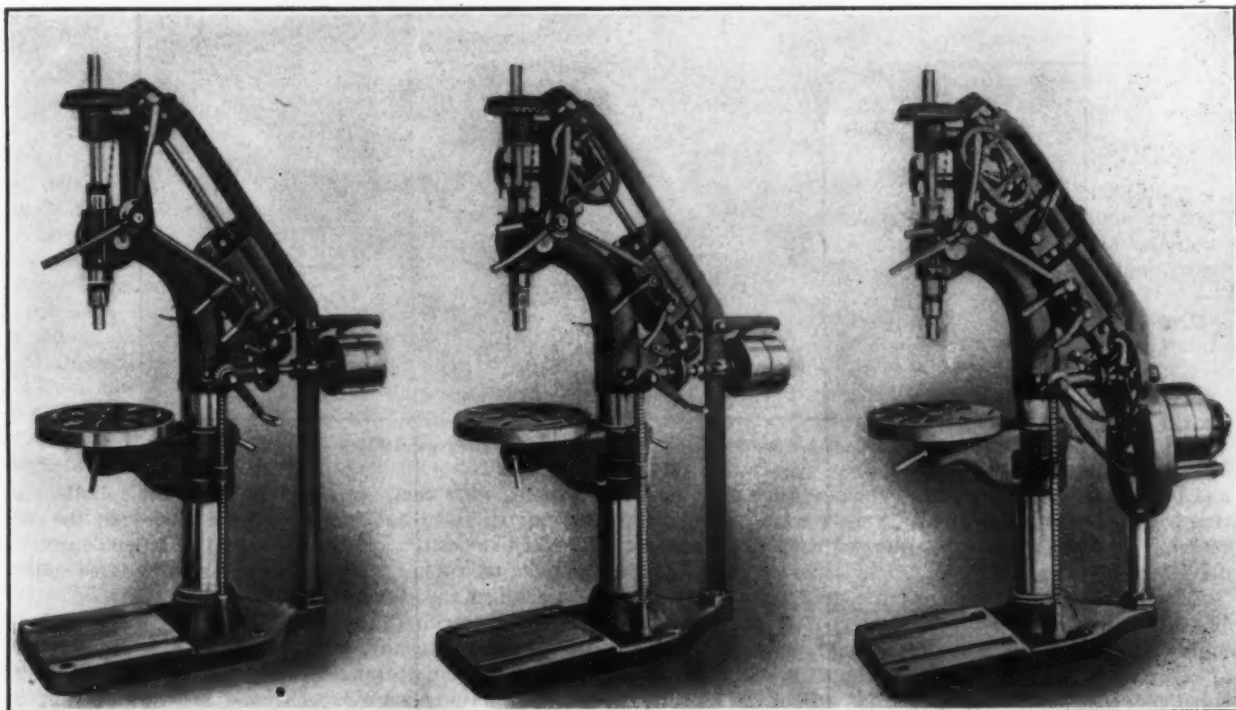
The Machine with Plain Wheel Feed and Back Gears.
